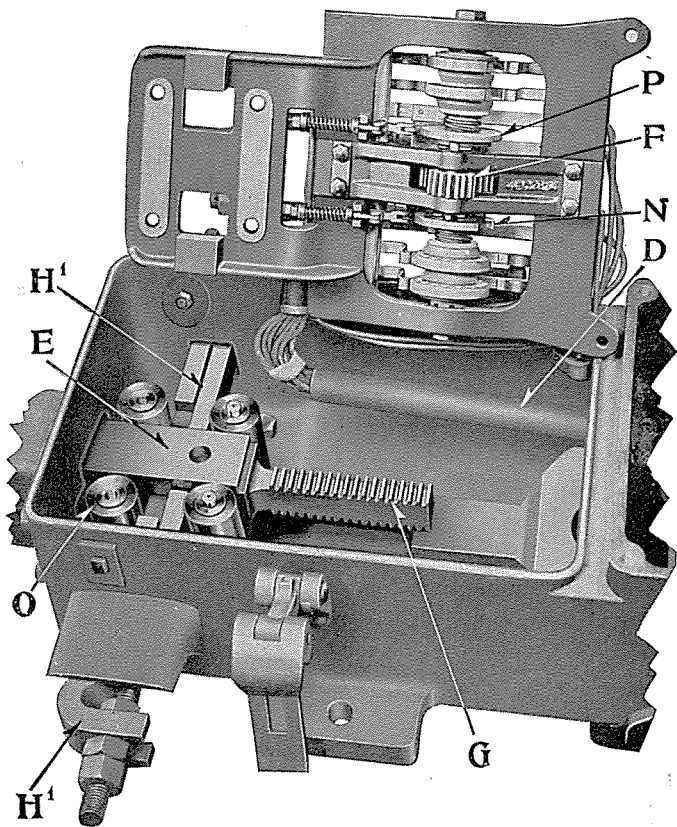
Style "M" Lock Box and inverted view of Circuit Controller.
